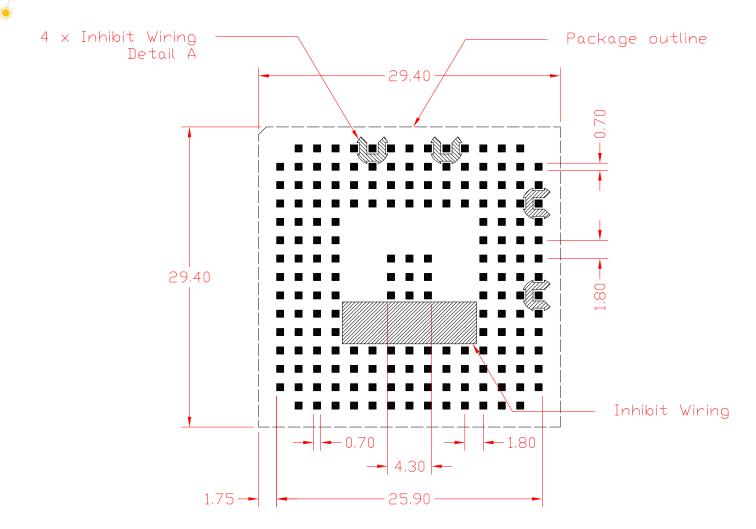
Recommended Footprint, Copper pattern - Top View, 181 pads for LE910Cx-WWX only (dimensions in mm)
